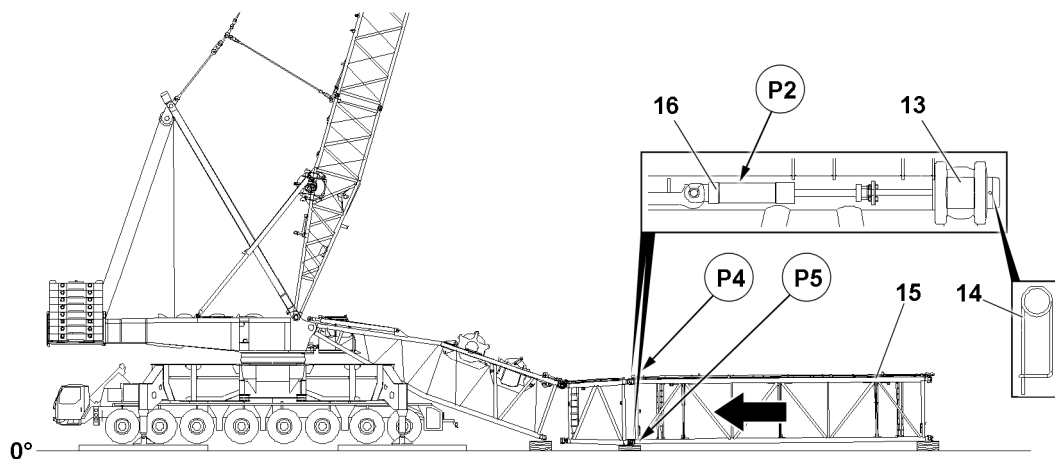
Assembling the SX-intermediate section on the LG-crane
